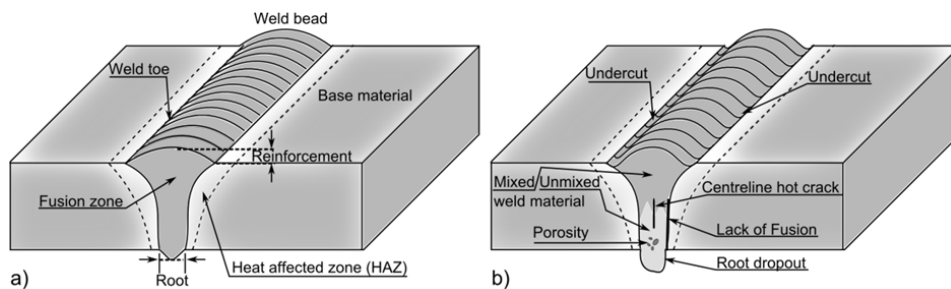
LAHW crosscut (a) designations; (b) common weld imperfections.
